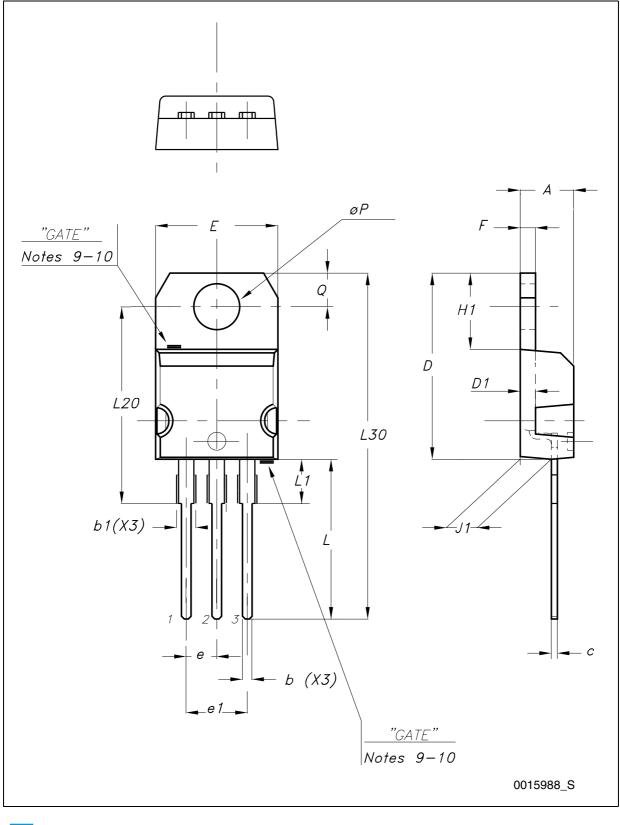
Drawing dimension TO-220 (type STD-ST Dual Gauge)
